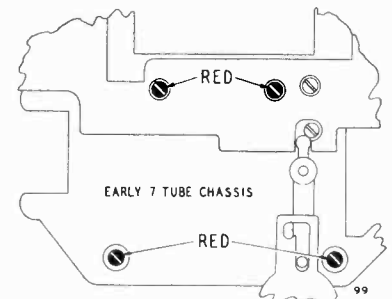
Location of 4 Red Mounting Screws in Early Models
